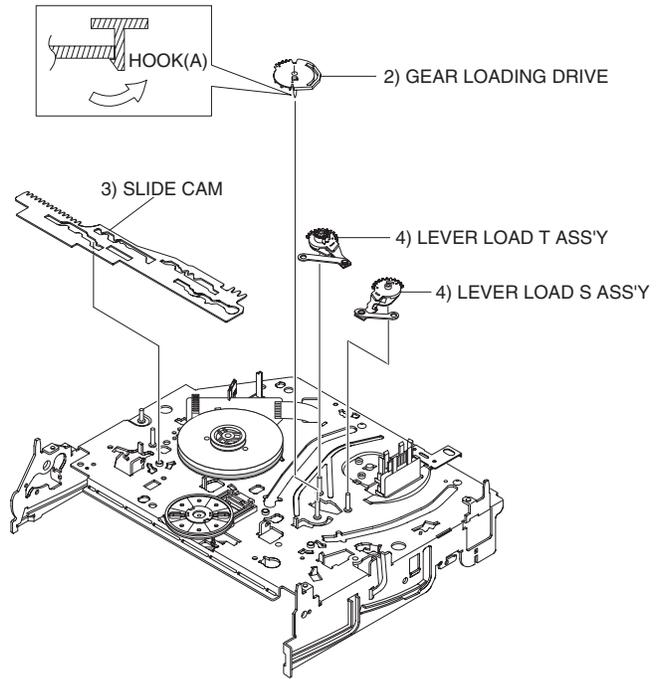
Gear Loading Drive, Slider Cam, Lever T, S Load Ass'y Removal
